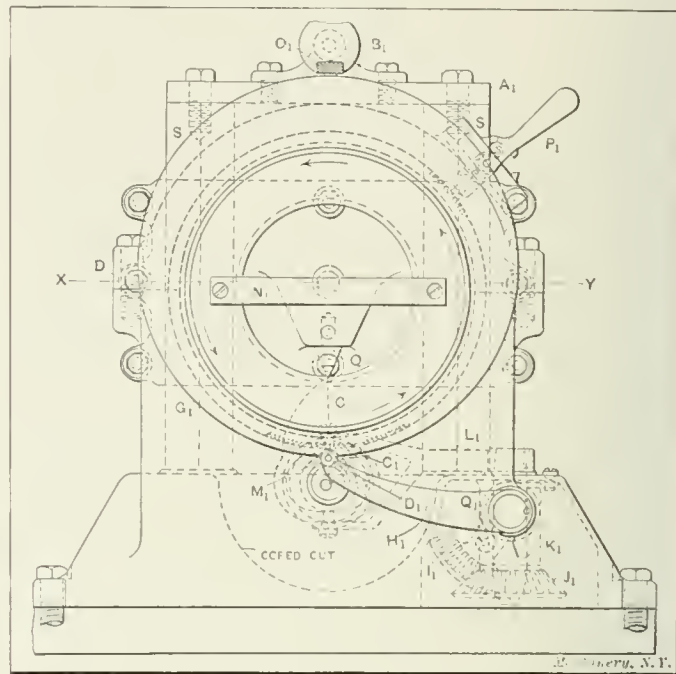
Front Elevation showing Indexing and Striking Mechanism
